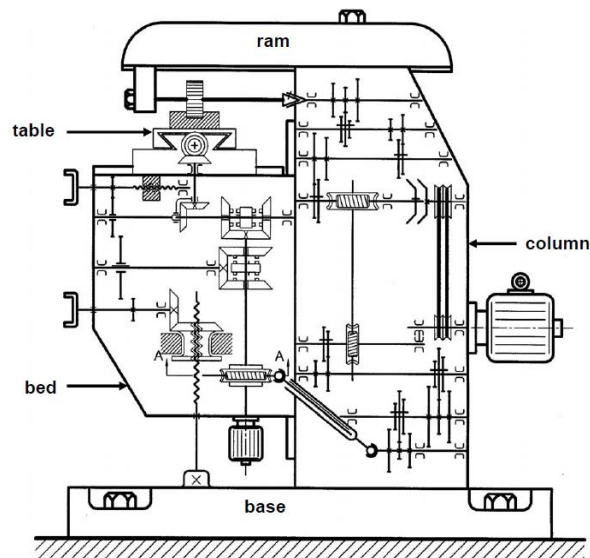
Kinematic diagram of a horizontal milling machine [21]
